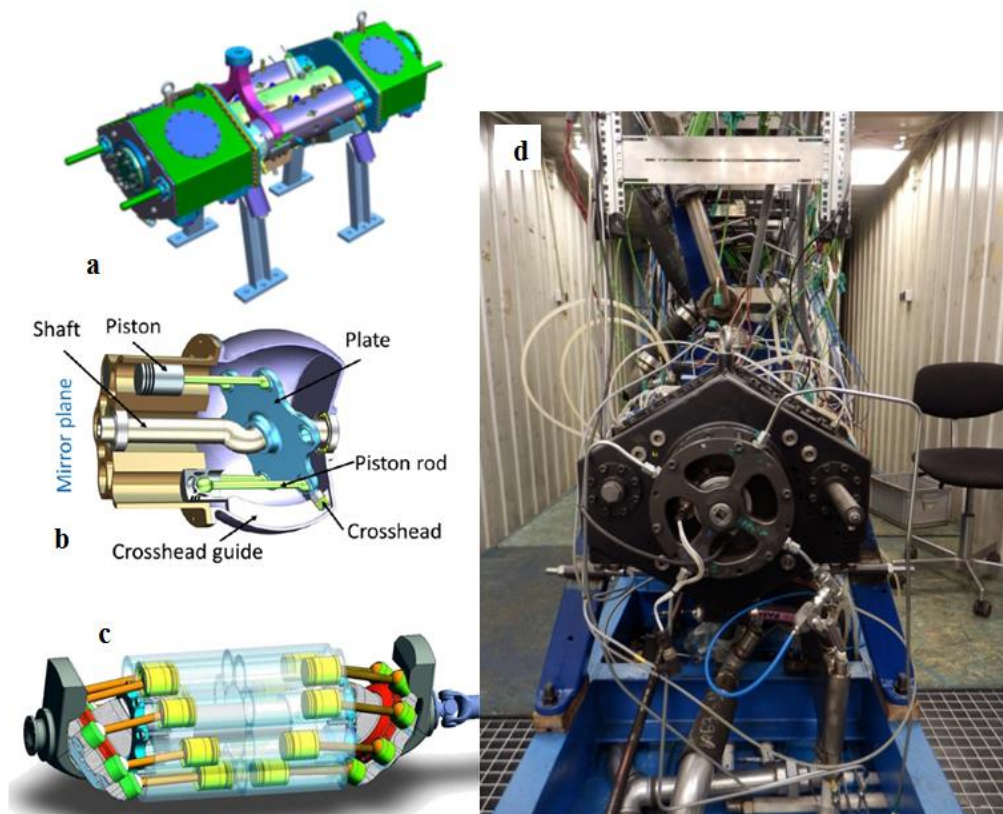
(a) PAMAR-4 CAD Model without Auxiliary Equipment (b) PAMAR-4 Wobble Plate (blocked by crosshead, half of the engine) (c,d) Engine Picture and Schematic Diagram
